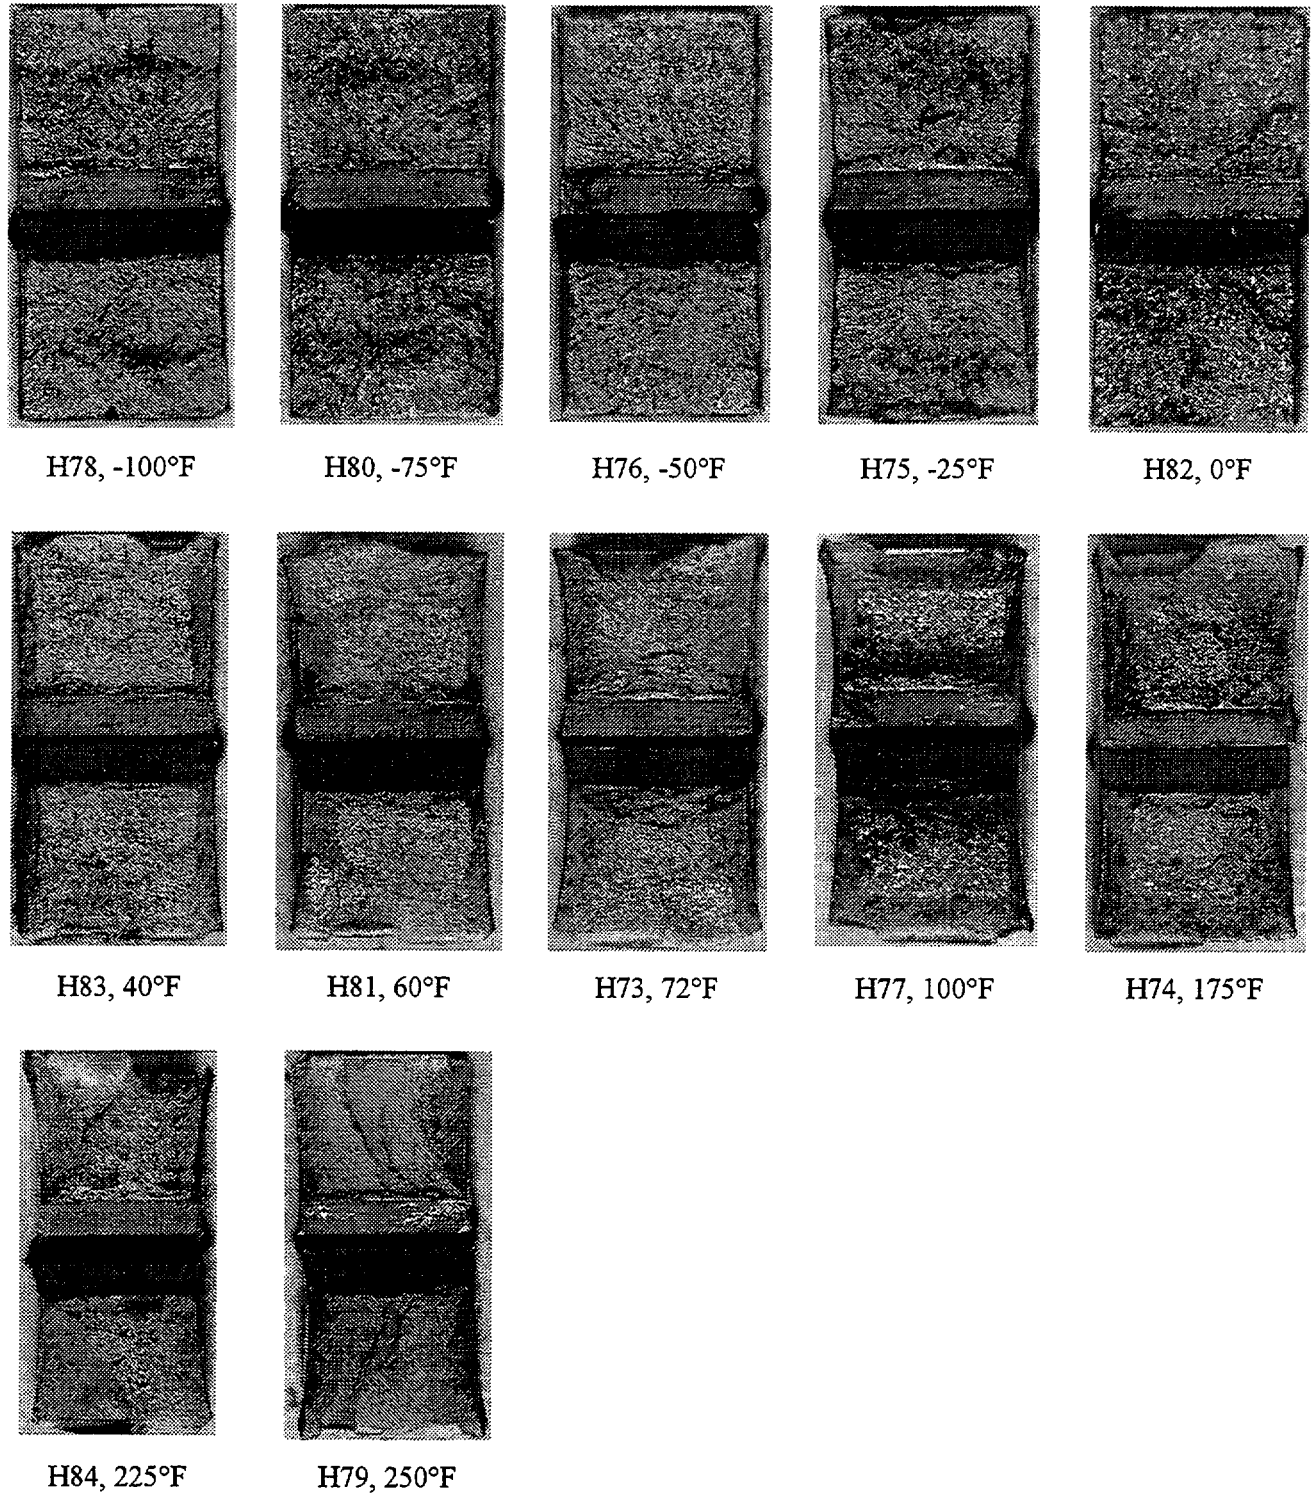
Charpy Impact Specimen Fracture Surfaces for Sequoyah Unit 2 Reactor Vessel Intermediate Shell Forging 05 (Tangential Orientation)
